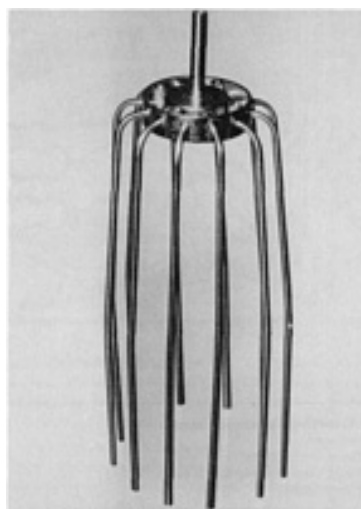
MANIFOLD AND CANNULAS TUBE ASSEMBLY OF A BLOOD-CELL WASHER THAT WAS HYDROGEN FURNACE BRAZED WITH BNi-7 BRAZING FILLER METAL AT 1040 °C (1900 °F). COURTESY OF WALL
